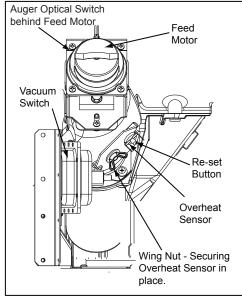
Feed Motor, Vacuum Switch, Exhaust Blower, Overheat Sensor
